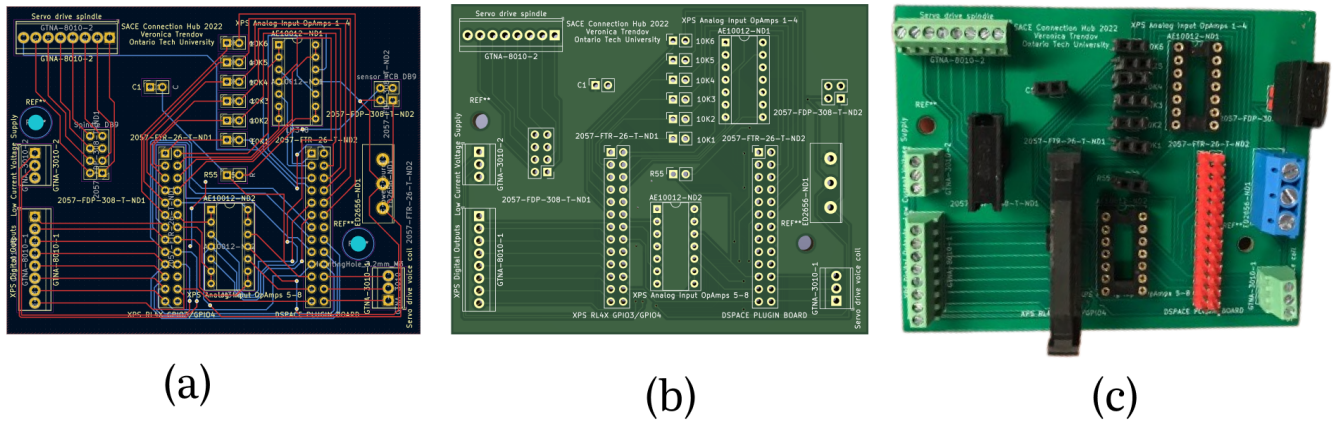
Connection Hub PCB. (a) Board Design on KiCad. (b) 3D View on KiCad. (c) Actual PCB with soldered component.
